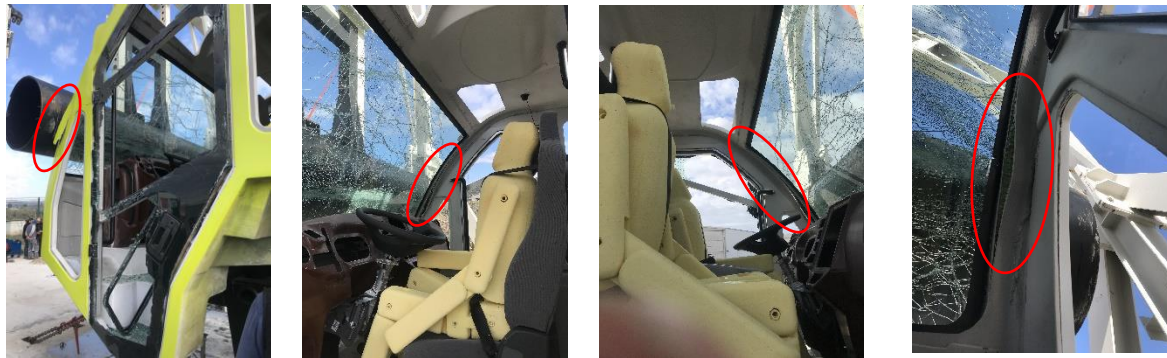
Front Pillar Impact Test of Failure Assessment (Test B)
